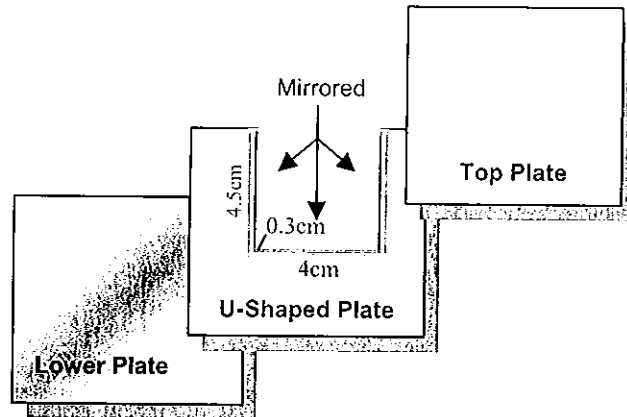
Three acrylic plates used to construct a QDSC mould
